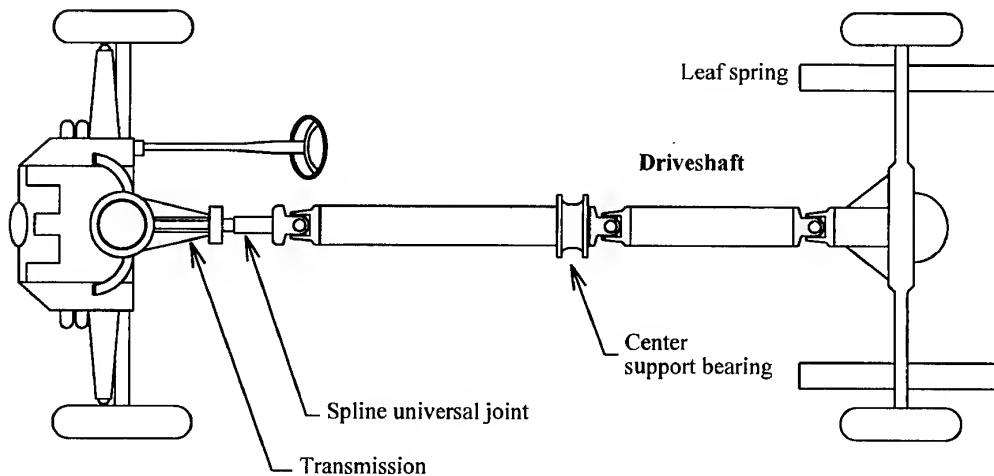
Schematic diagram of the drive shaft for a rear wheel driving vehicle.
